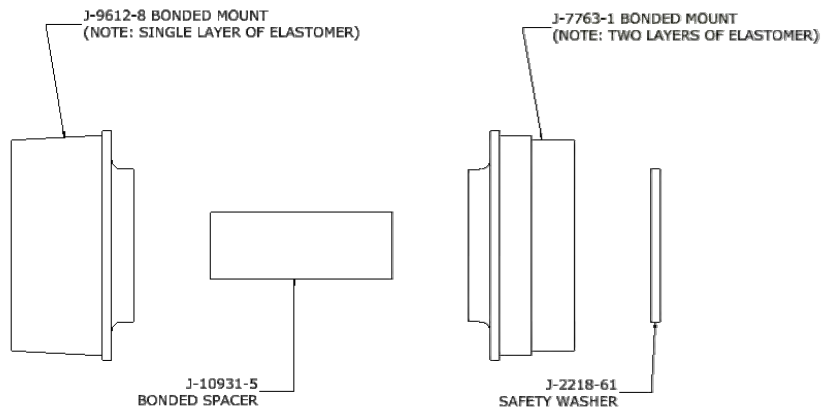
ENGINE MOUNTING ASSEMBLY KITS
